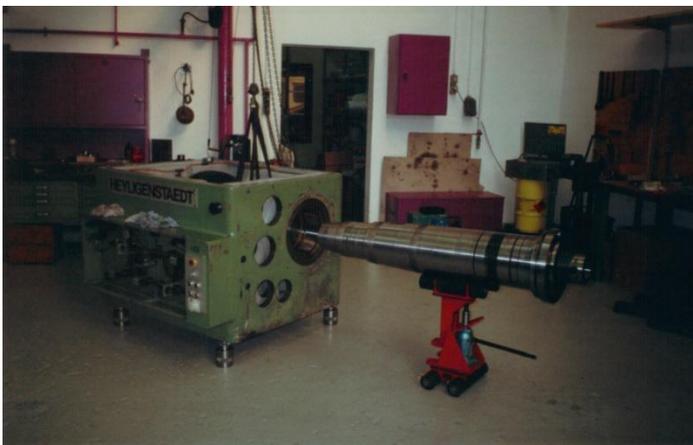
Second Repair of headstock bearing defect. View of the expanded main spindle of the machine Heyligenstaedt.
